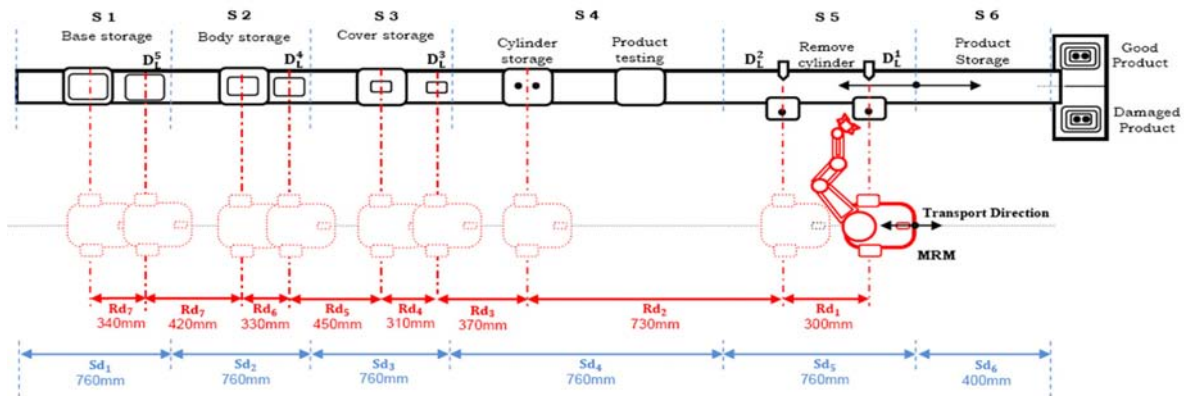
Assembly/disassembly line of a product consists of 5 components, served by the WMR equipped with RM
